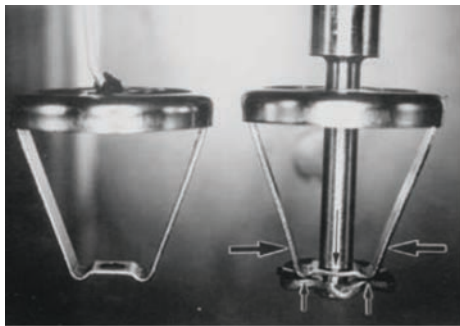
Ice cream mixer blade as-manufactured (left) and assembled to spindle (right)
